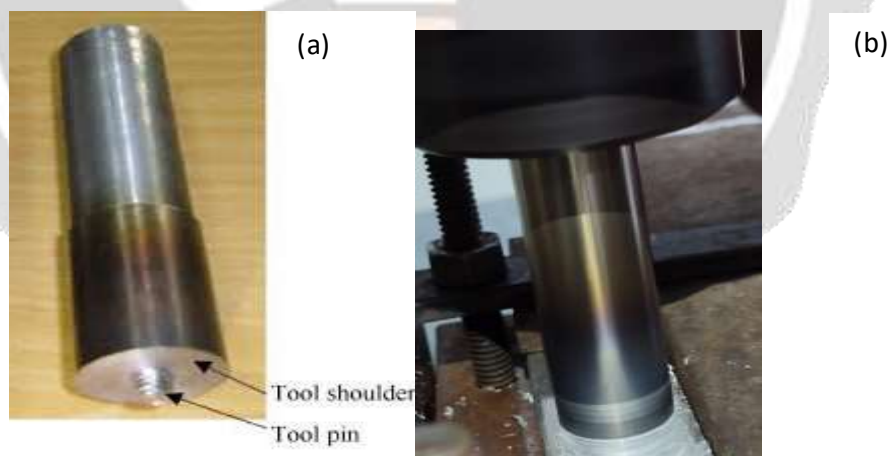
(a) HSS tool used for the process (b) Tool during the process
